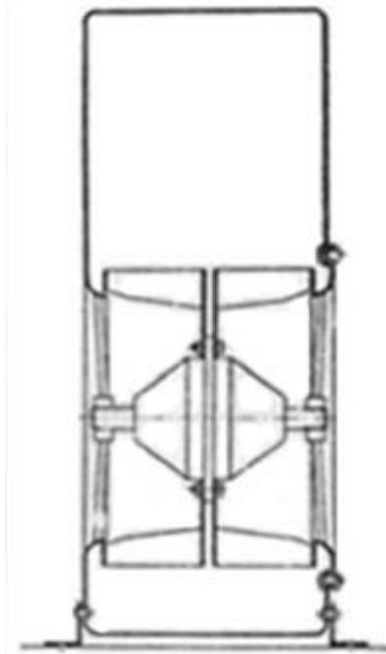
Multivane impeller with external electric rotor fitted inside the hub
